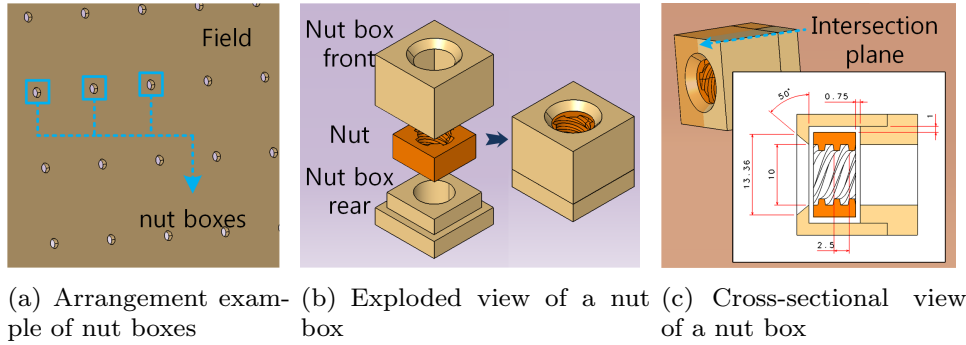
Arrangement example of nut boxes and 3D CAD drawings of a nut box
